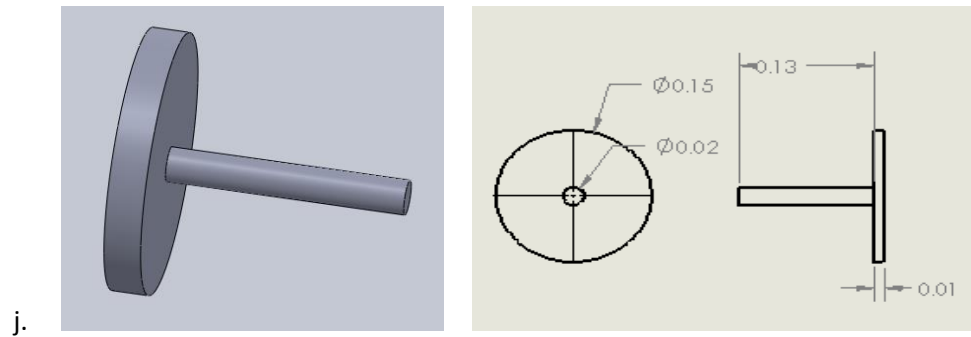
15 j) Punch 3D, 2D and section view drawing
